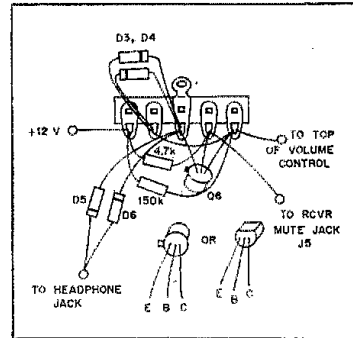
Parts placement of muting-switch circuit. Parts are mounted on a 5-lug solder terminal which is soldered to shield wall inside receiver. See Fig. 5.
